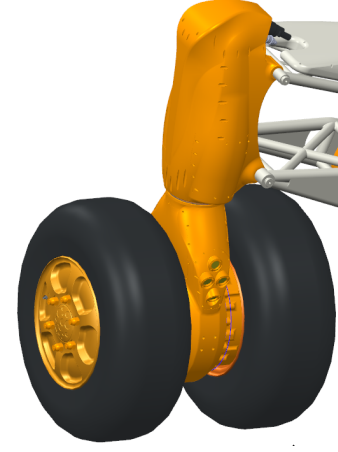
CAD model of rover wheel module prototype. Suspension arms hold the steering column. Each wheel has an in-wheel propulsion motor.
